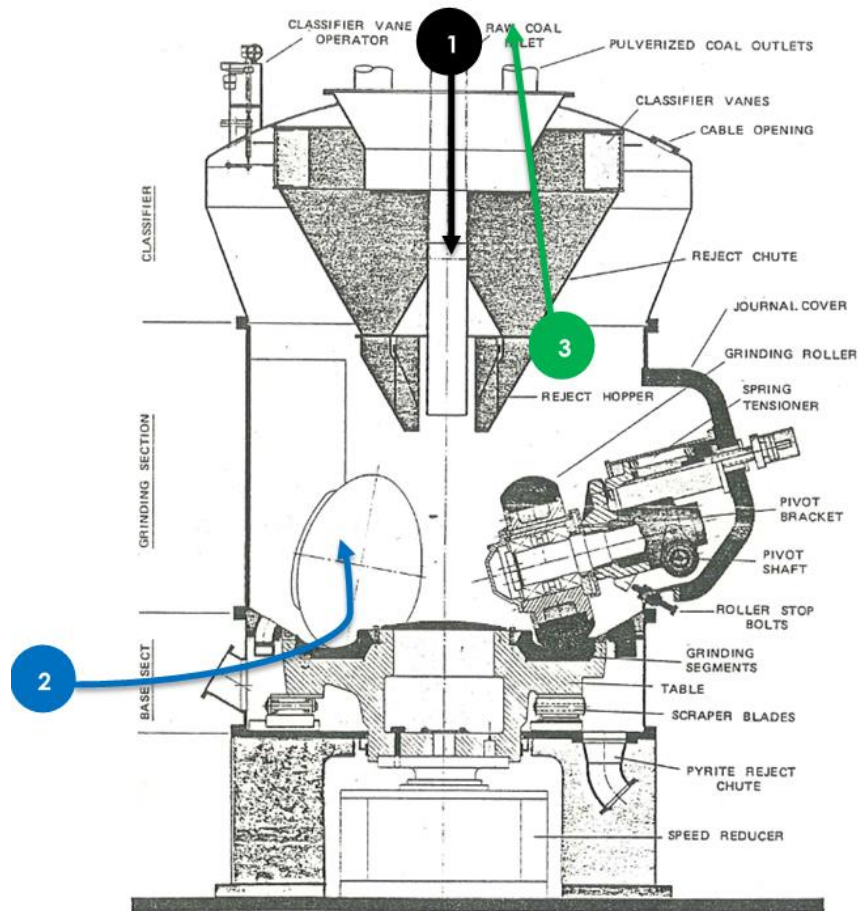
[1] Coal inlet; [2] Primary air inlet; [3] Coal + Primary air outlet.
